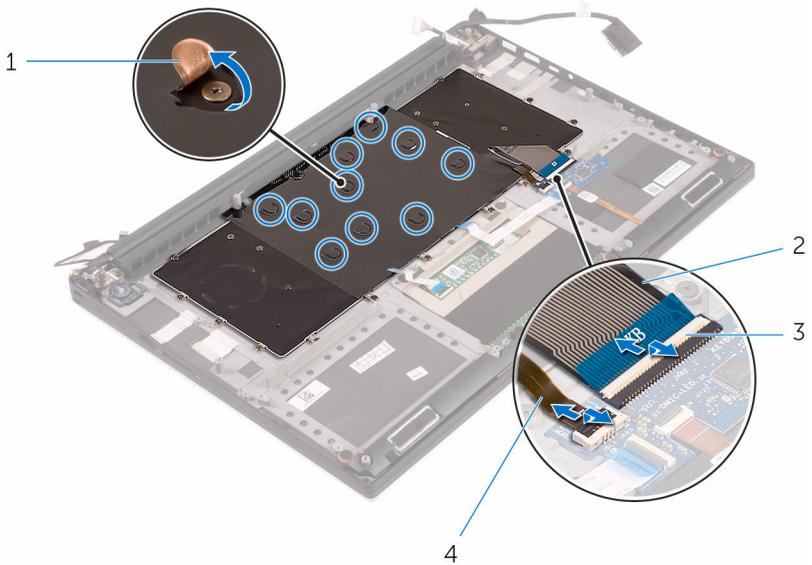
Disconnecting the keyboard and keyboard-backlight cable
